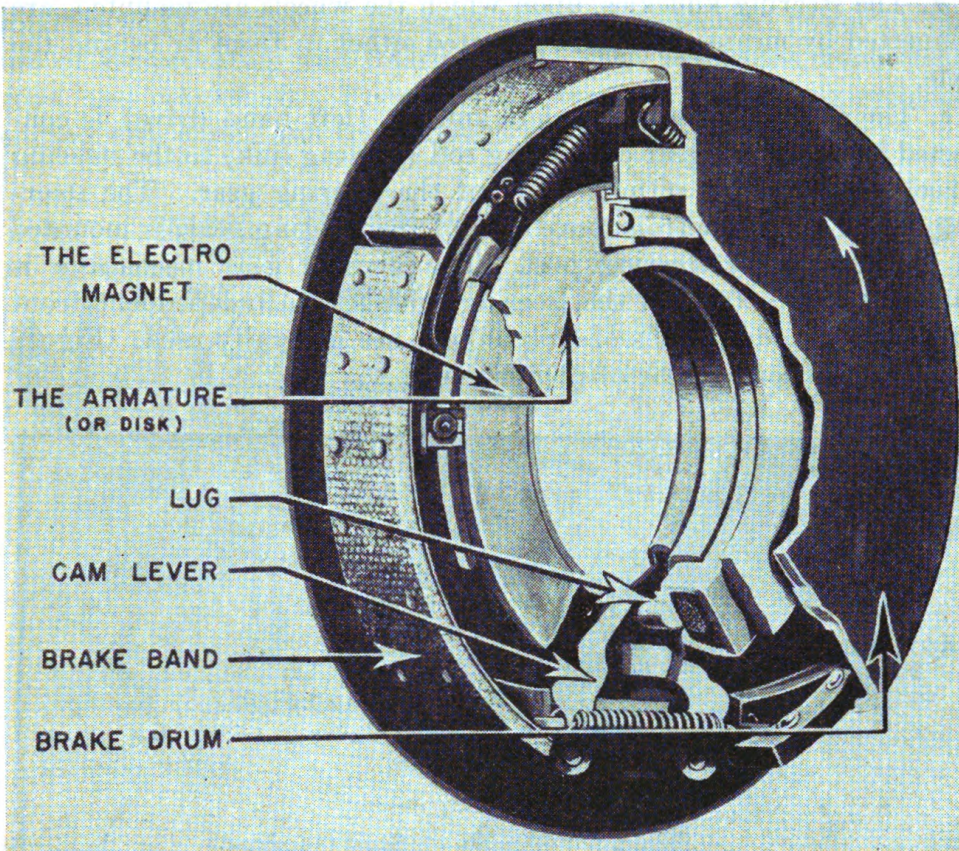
View of electrically operated wheel brake showing electromagnet and actuating parts.
